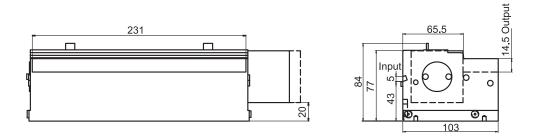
• Measurements Drawing, Compact Printer 01755-XXX
